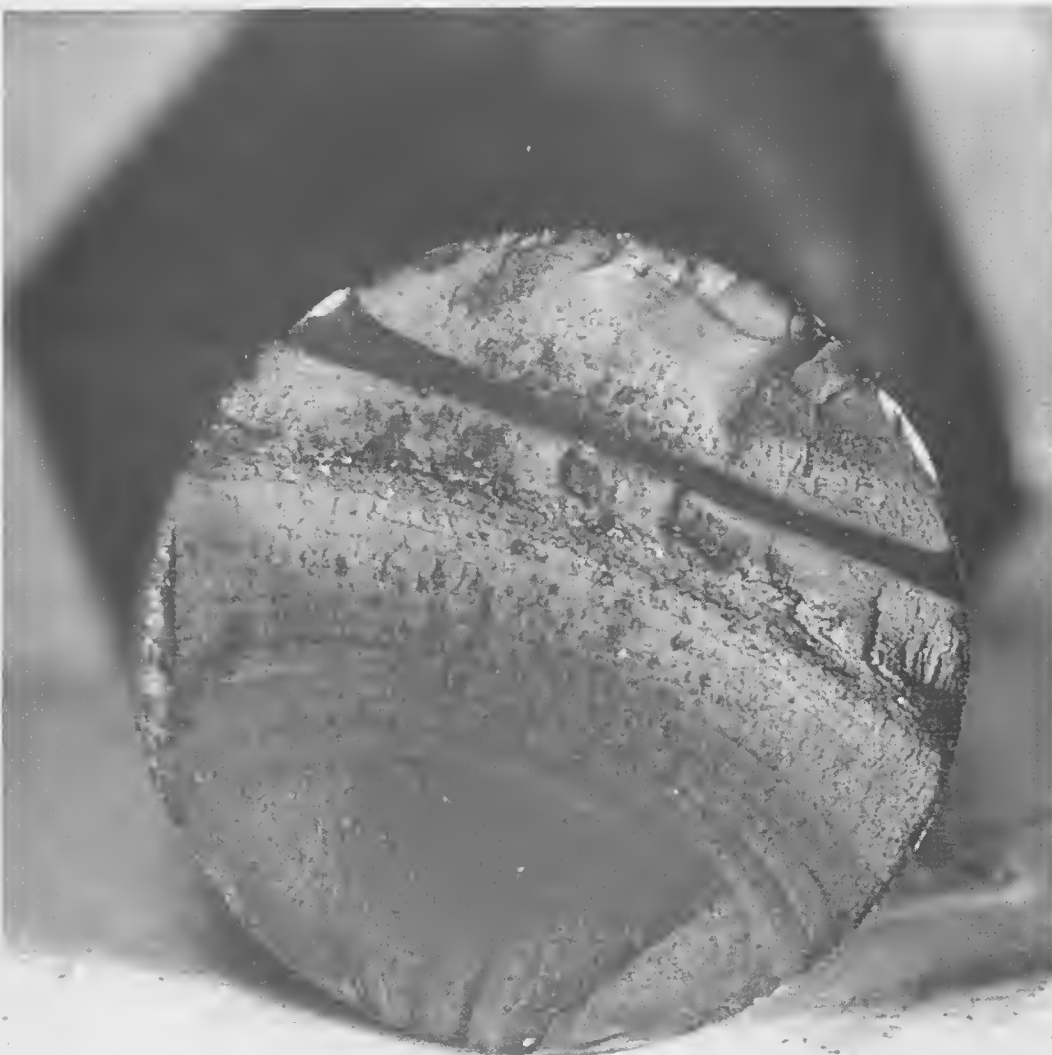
Fractured Grade 8 Pivot Bolt from Chip Truck.
